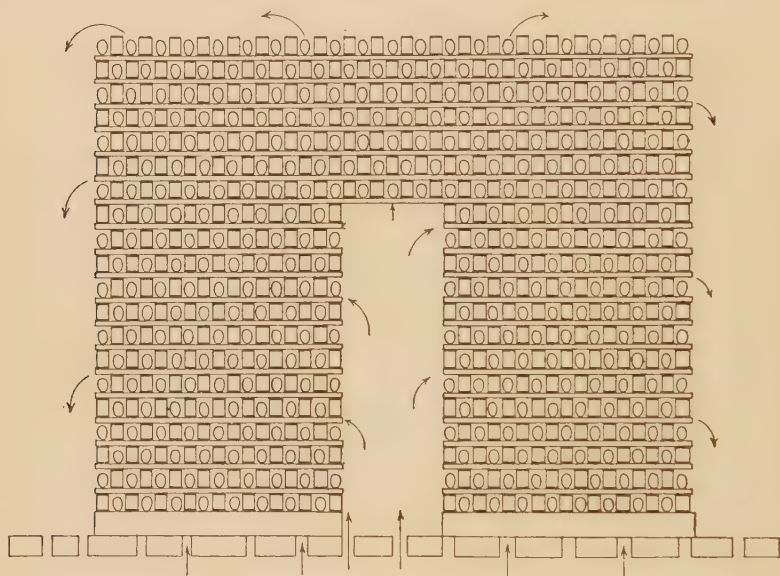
Ends of large wagon spokes piled on floor of kiln with vertical-lateral circulation. "Chimney" in center of pile.
